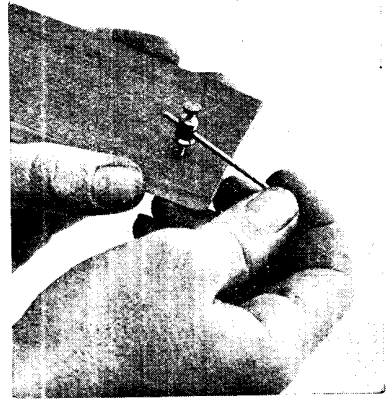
For attachment of a connecting wire a milled nut is used in this very convenient form of plug-in terminal,
